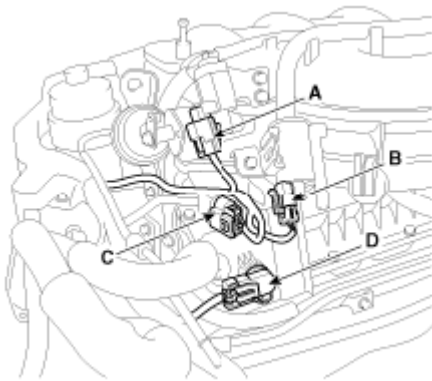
Identifying Connectors For VIS Solenoid Valve, PCSV, RH Oxygen Sensor, & RH Exhaust Camshaft CMP Sensor
